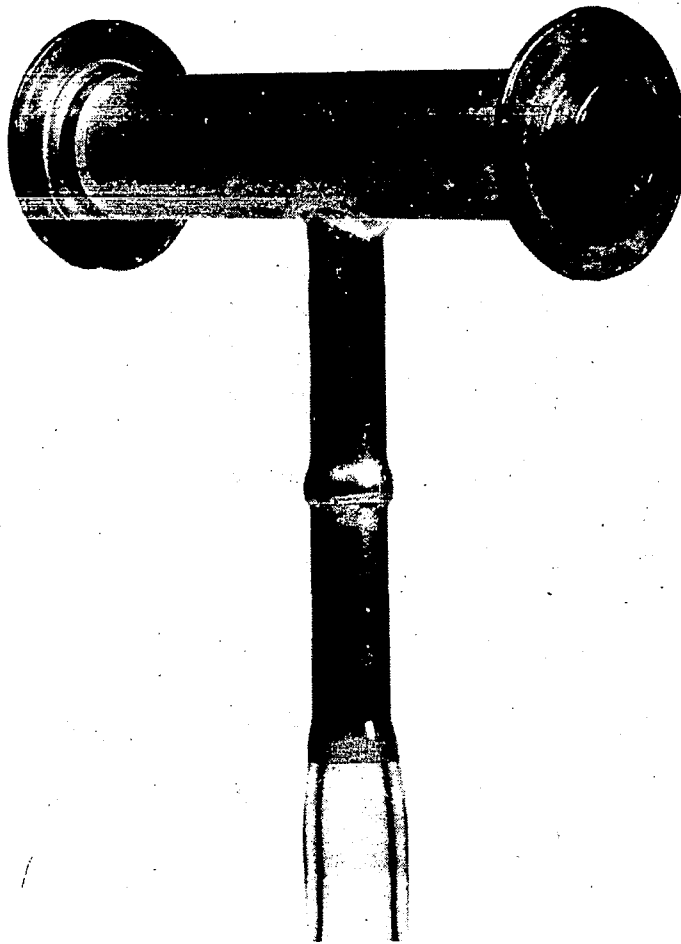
Fixture to test welding procedures and vacuum properties of metal-to-metal mirrors.
